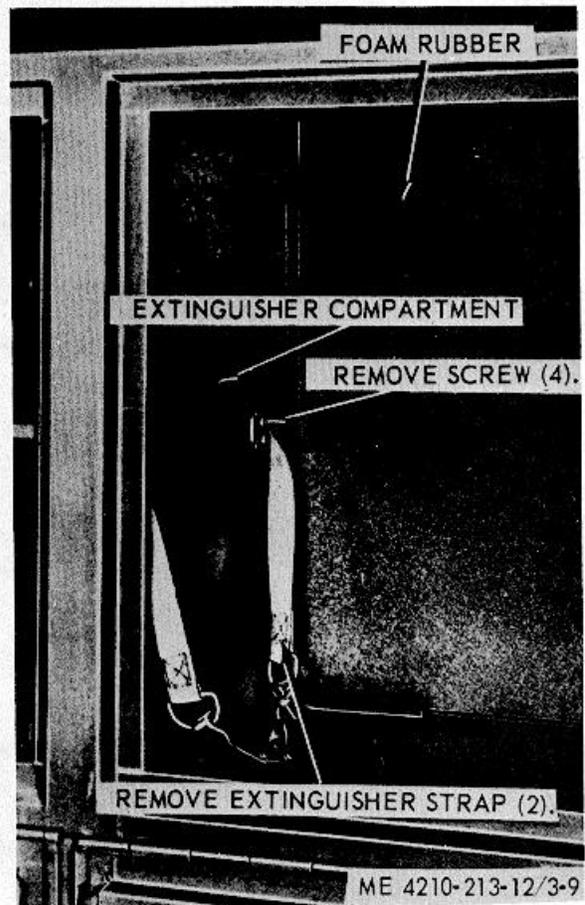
Extinguisher compartment accessories, removal and installation.
